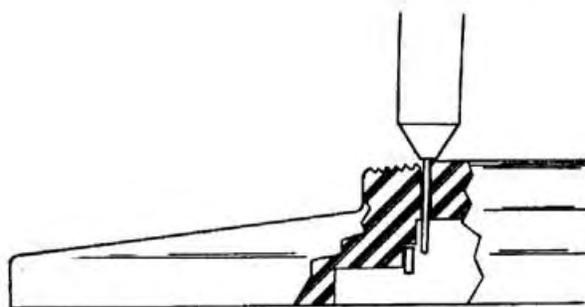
Withdrawal. Latching Tab Has Snapped into Recess Molded in Fingerwheel Out of Reach of Tool.
